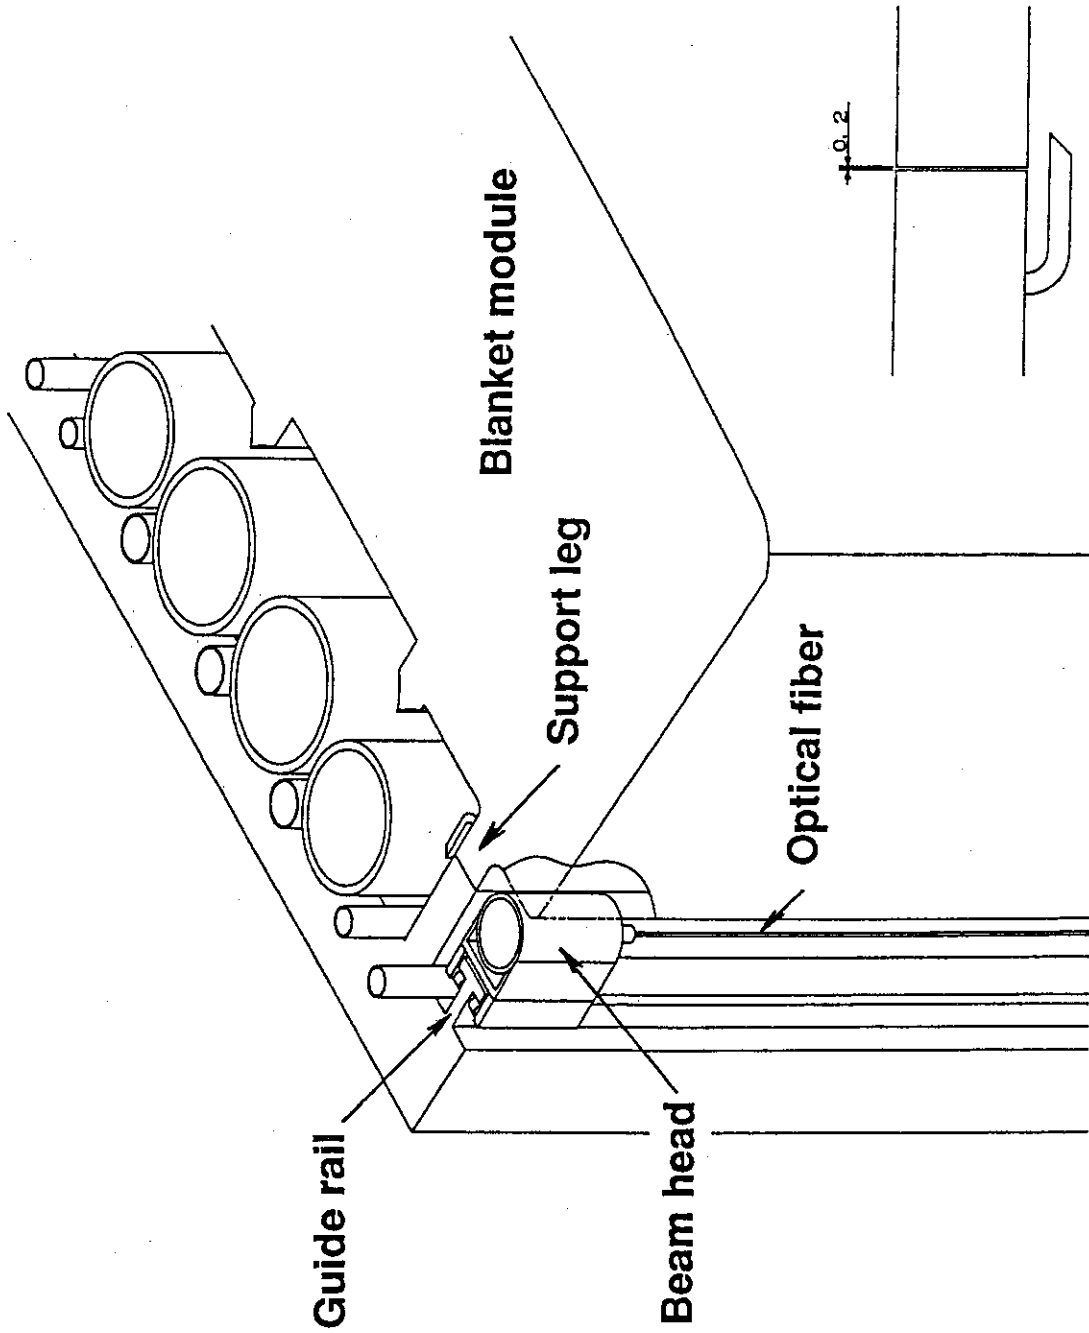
9 Basic concept of iodine/YAG laser beam welding/cutting of the support leg of the blanket module.
